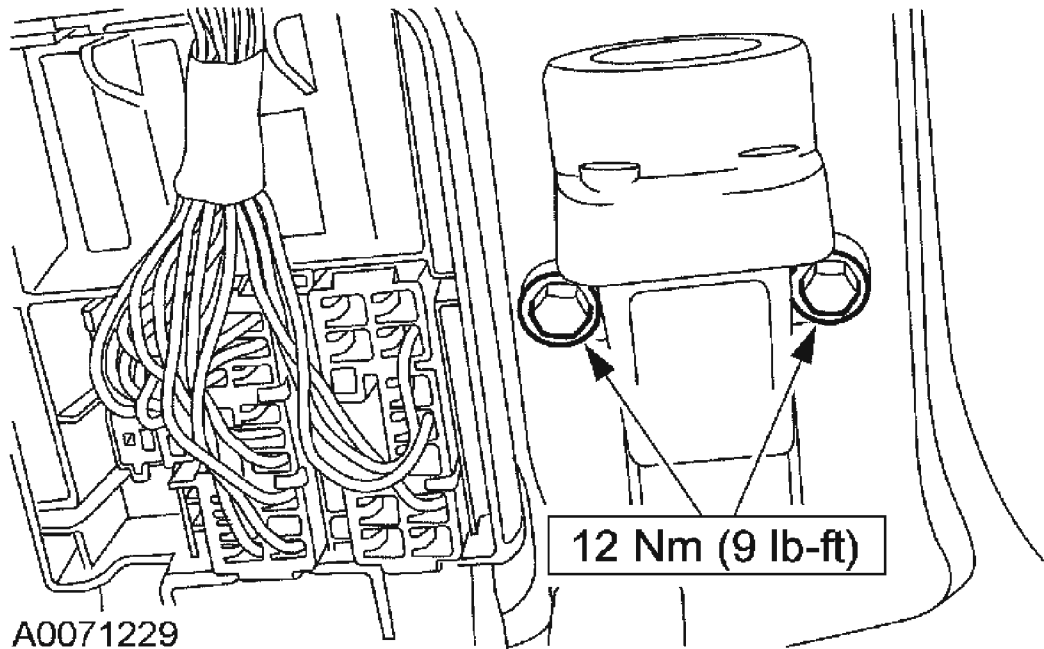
Removing Bolts And Inertia Fuel Shutoff Switch
